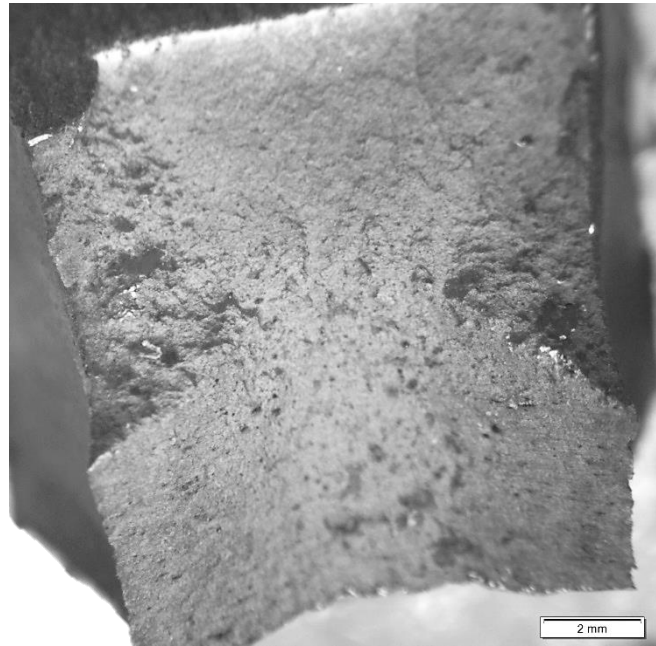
Stereoscopic image of the tensile fracture surface of sample 3 (No heat treatment prior to welding and a 672h PWHT at 635°C).
